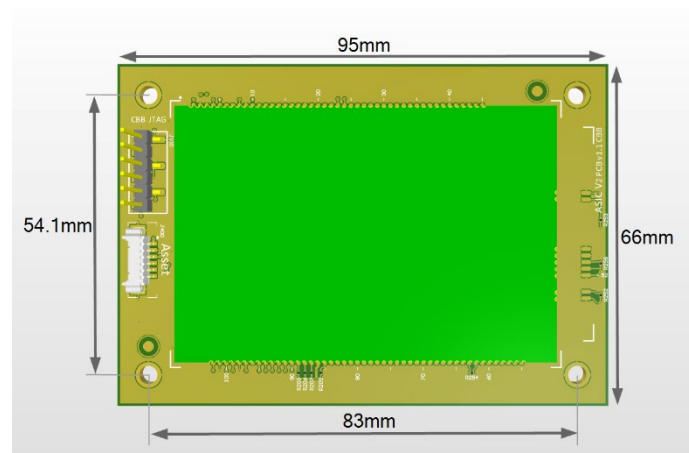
Mechanical dimensions of the Carrier Board, including hole measurements.
